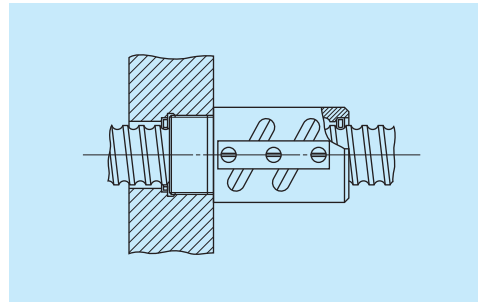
Installation of brush-seal to a ball nut with thread screw
